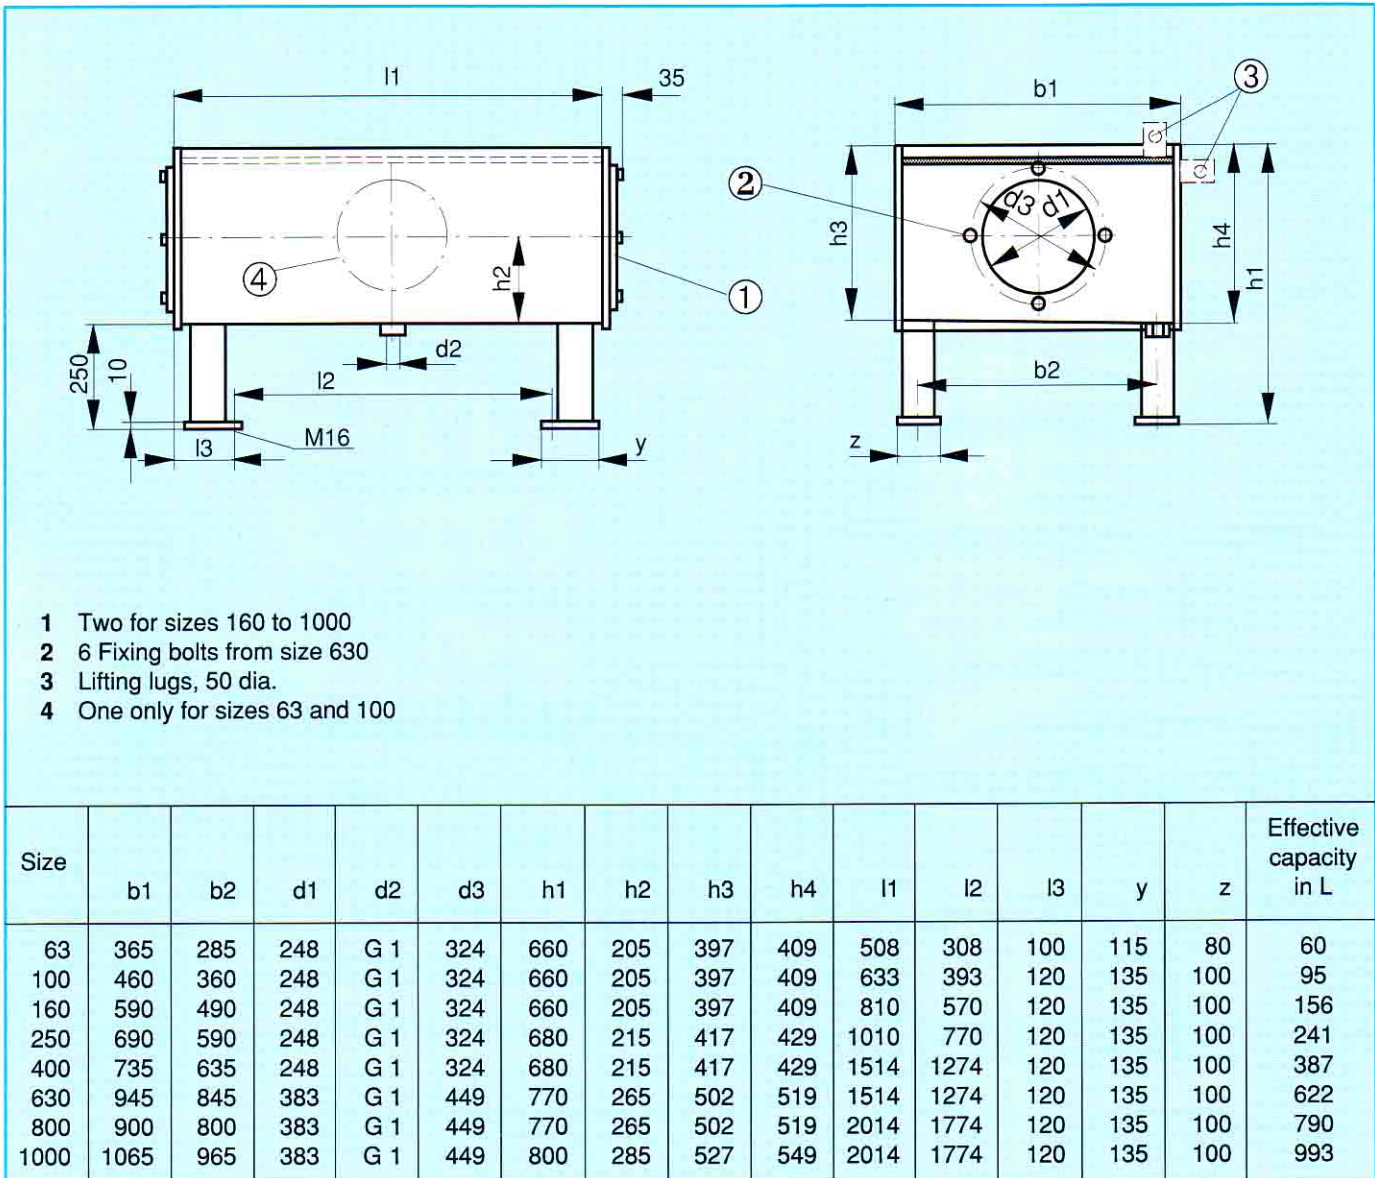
Principal dimensions of rectangular oil tanks in steel similar to DIN 24 339
